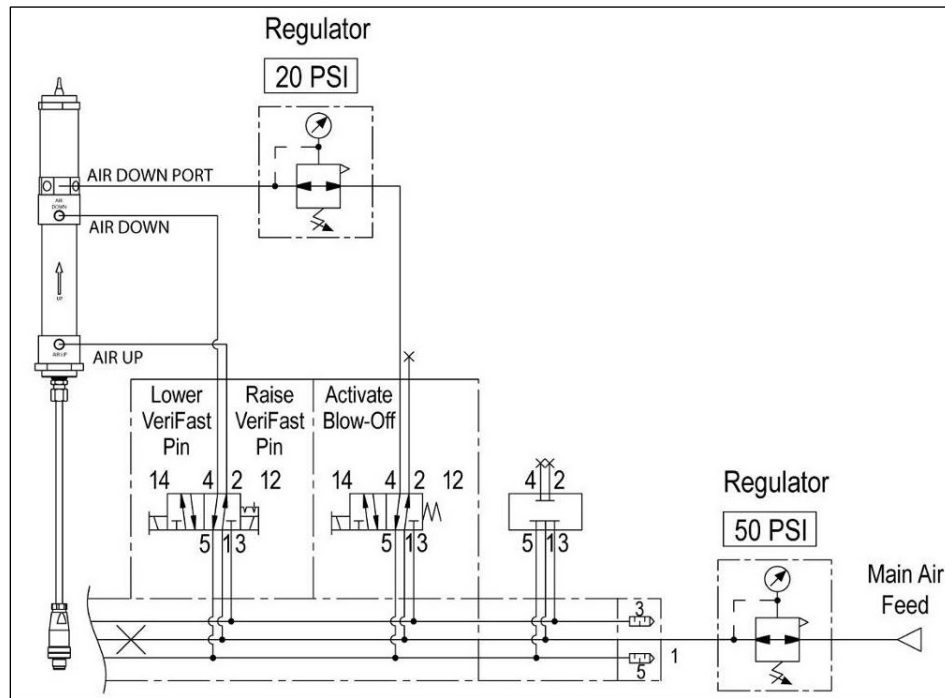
Pneumatic Connection Diagram for VeriFast™ IA Clamp Mount Weld Body (Only) with Retractable Pin
